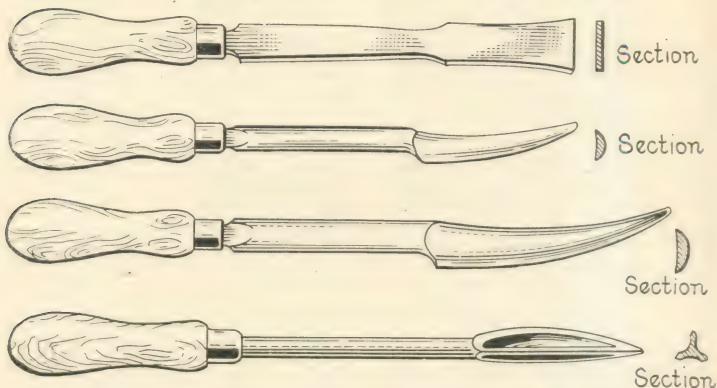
TYPES OF SCRAPERS USED FOR BEARINGS
